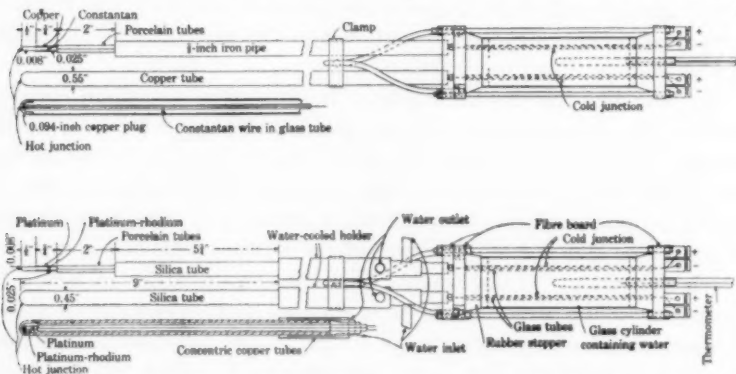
CONSTRUCTION OF THERMOCOUPLES. UPPER HALF, COPPER-CONSTANTAN COUPLES; LOWER HALF, PLATINUM AND PLATINUM-RHODIUM COUPLES
